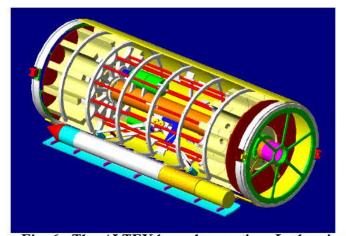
The ALTEX launcher section. In drawing and picture, part of the shell has been removed.
